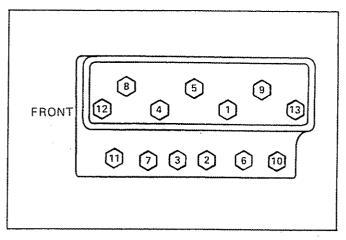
A2-23-Cylinder Head Torque Sequence-V-6
